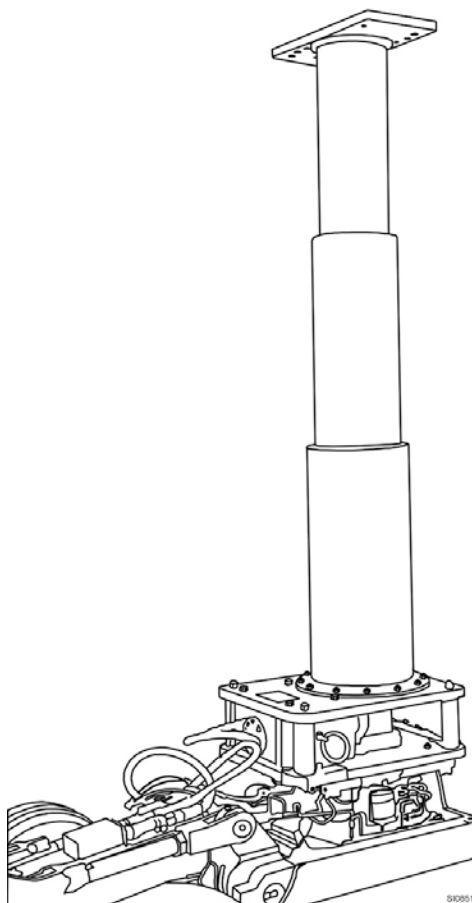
Mechanical ram assembly extendedly collapsed.
